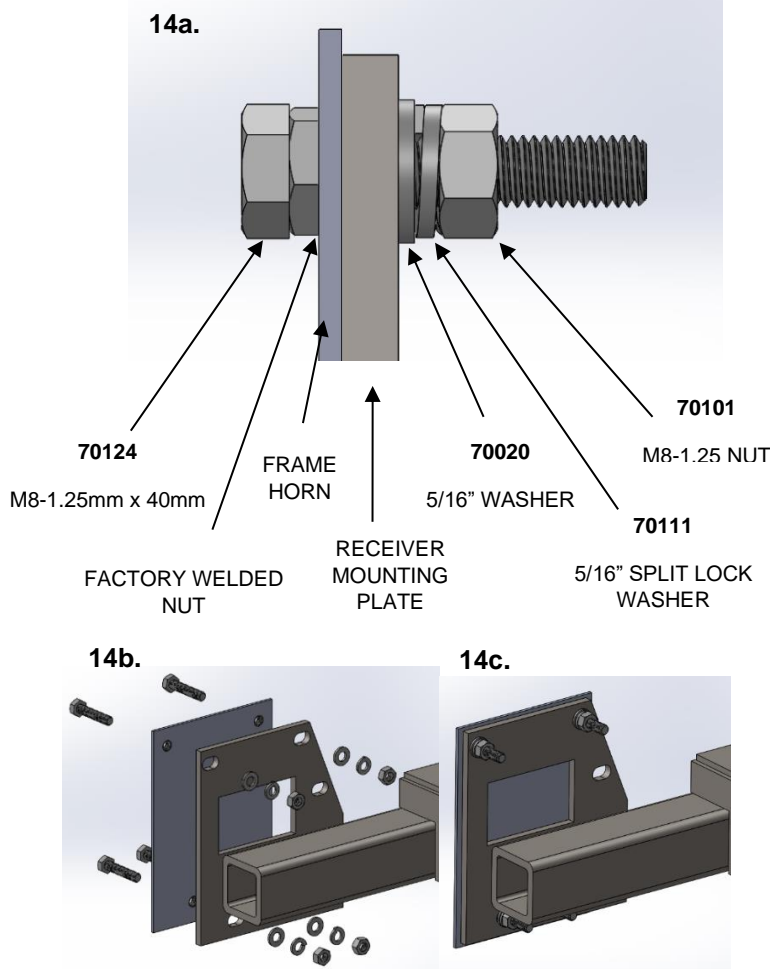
Top to Bottom (a) Detailed view of hardware used to mount receiver to frame mounts (b) exploded view of hardware mounting for receiver (c) final assembly after bolts, washers and nuts are assembled and tightened down.
